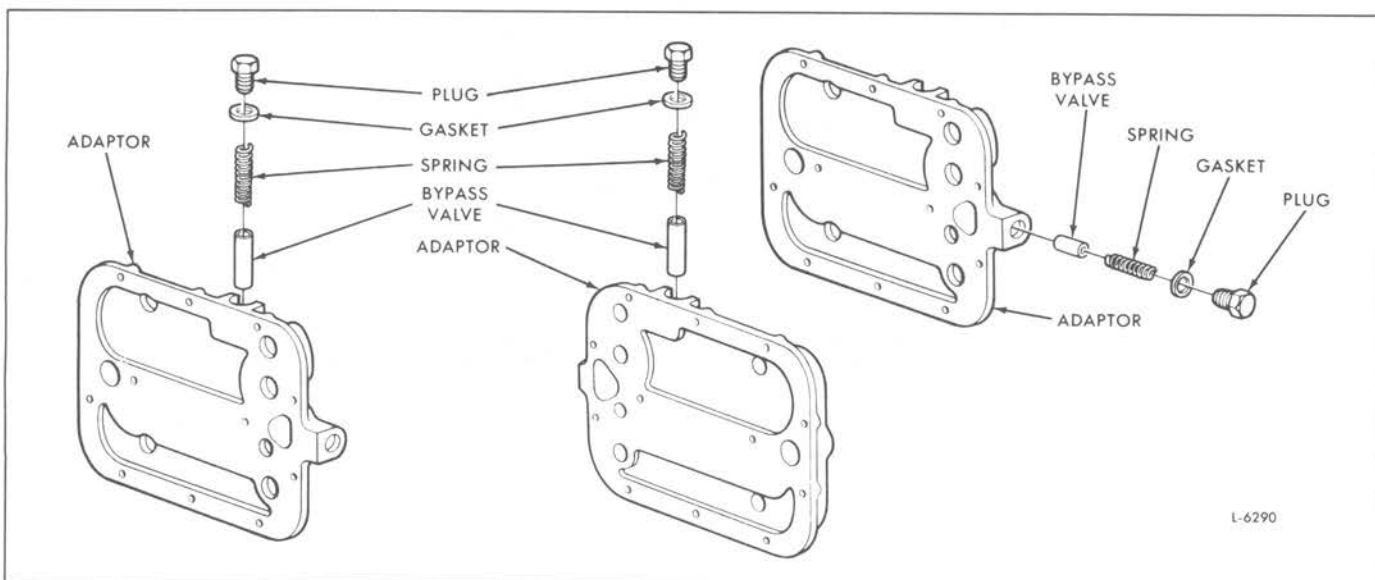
Oil Cooler Adaptors with Bypass Valve Assembly Components
